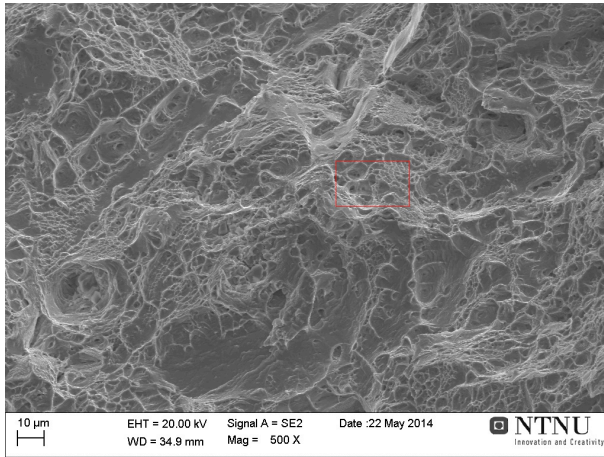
The fracture surface from the standard tensile test of Alloy 718.
